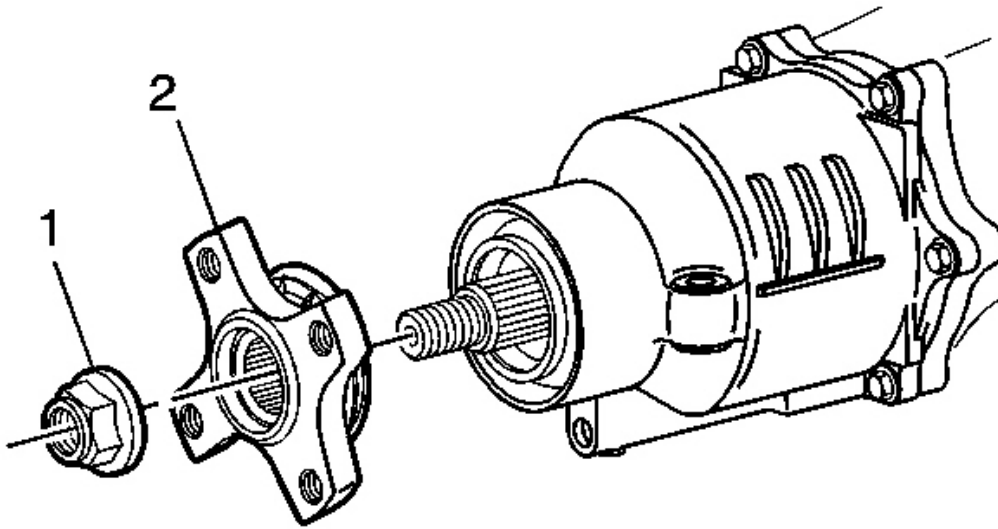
Removing/Installing Input Flange On The Clutch Shaft
